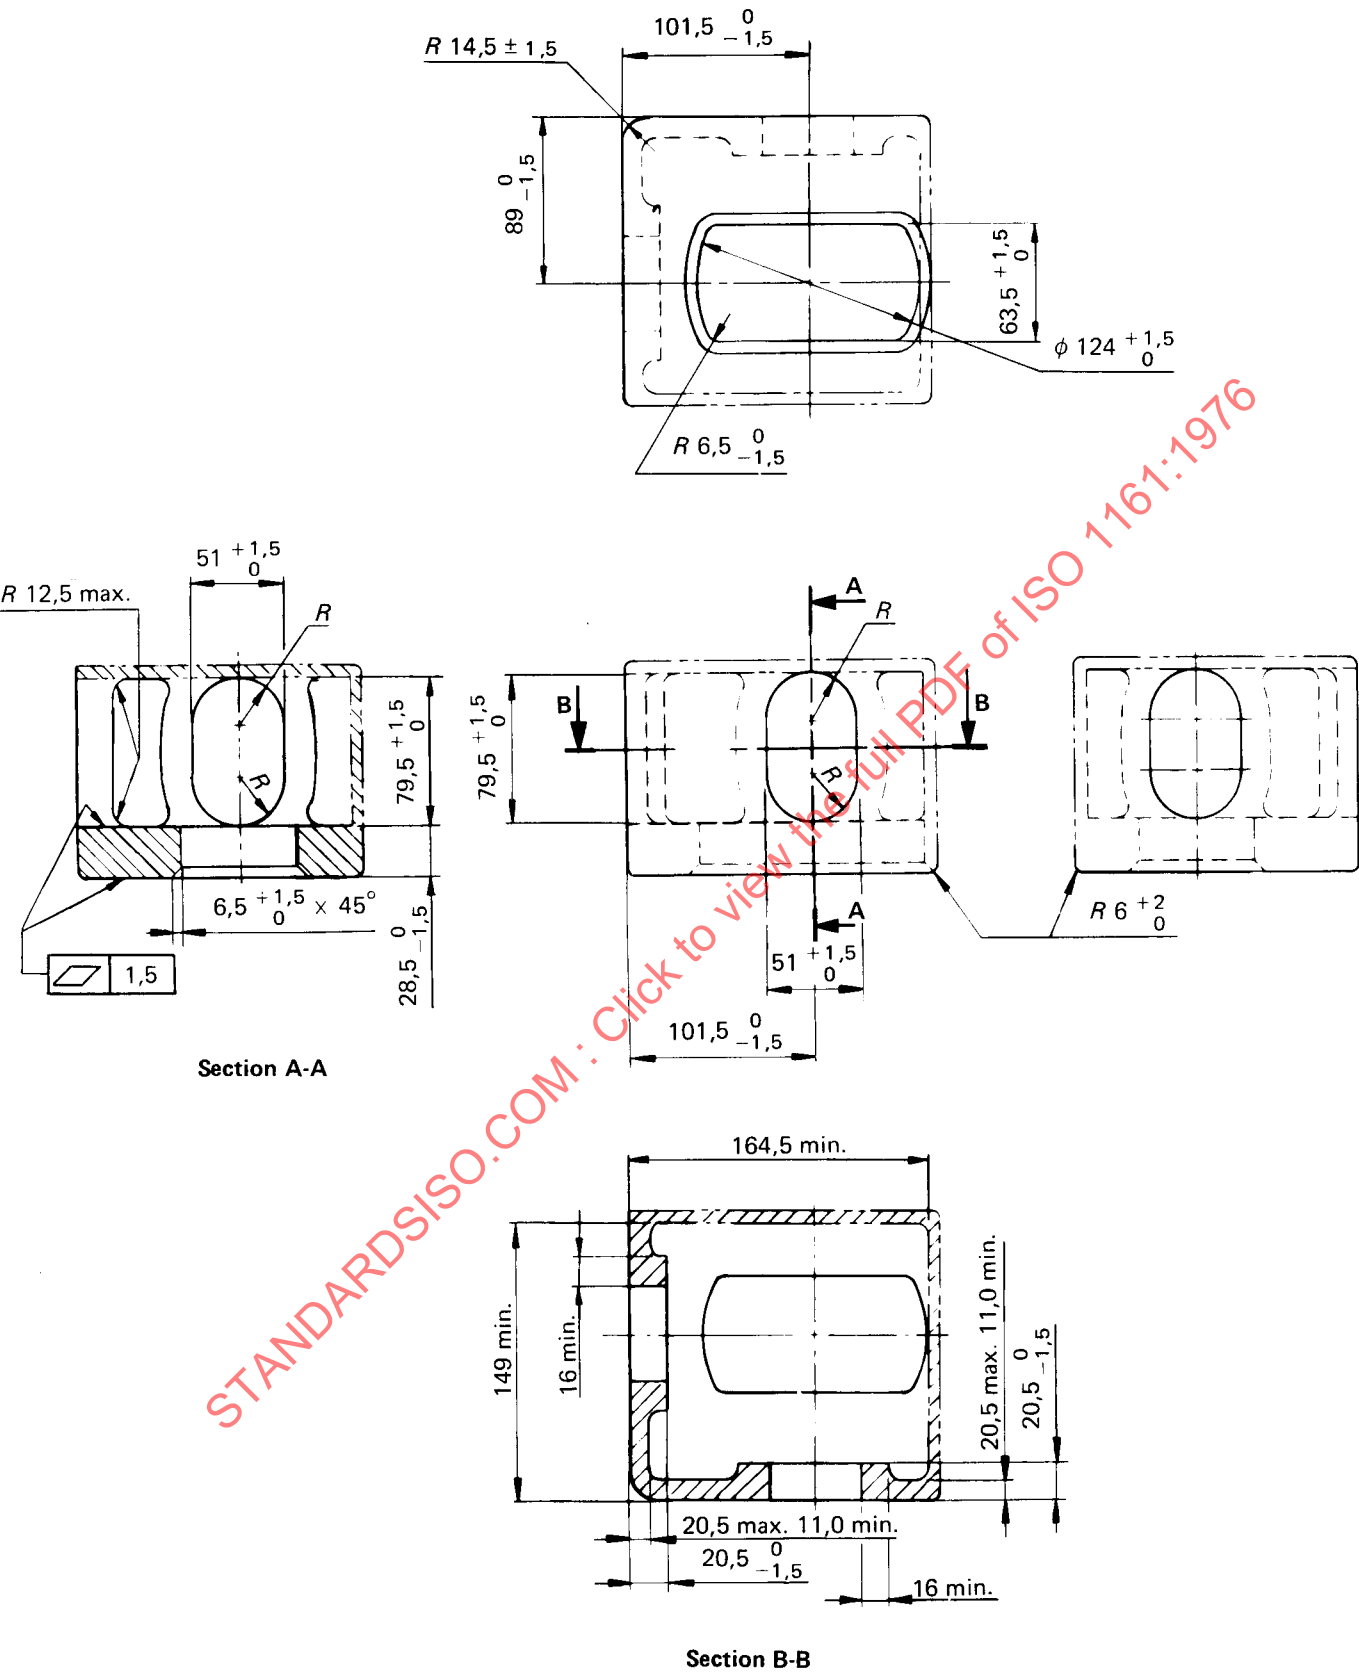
Top corner fitting — Dimensions in millimetres
